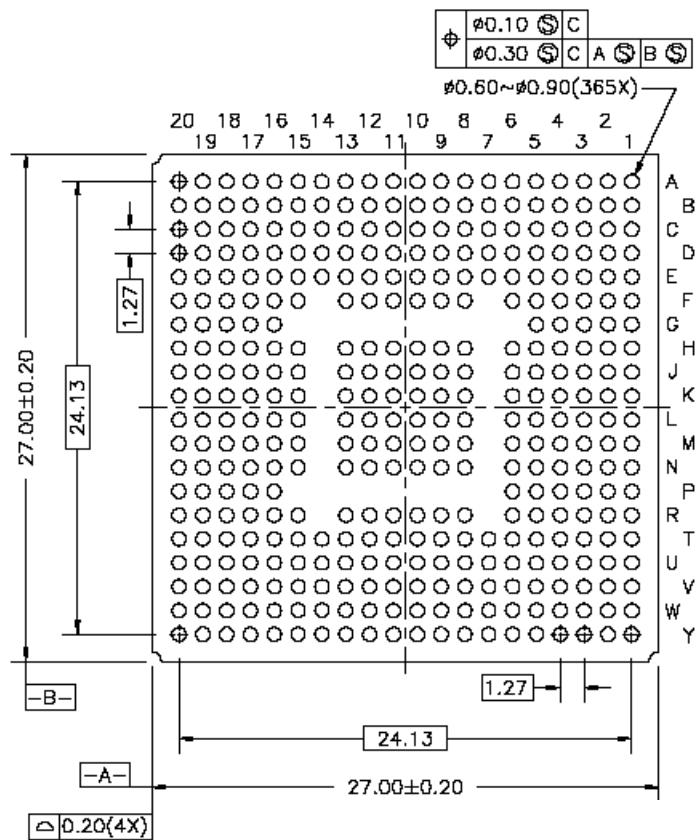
Package and Ball Array Dimensions (bottom --> up view)
